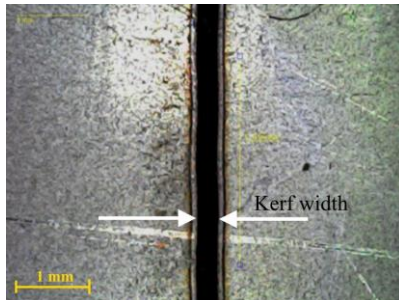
Top view of laser cutting results at a cutting speed of 4 m/min and a nozzle diameter of 1 mm.
